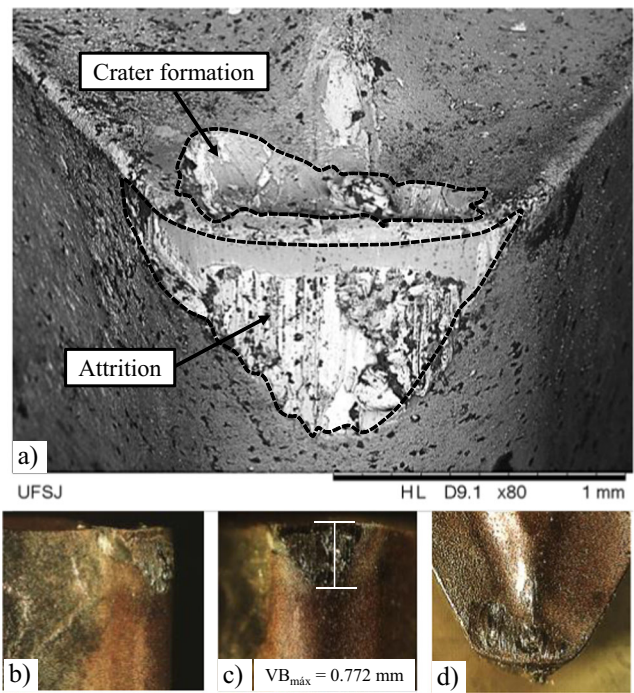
Cutting tool with $VB_{max} = 0.772$ mm used in dry turning with cutting speed of 400 m/min. a SEM. b Clearance surface. c Tip. d Rake surface
